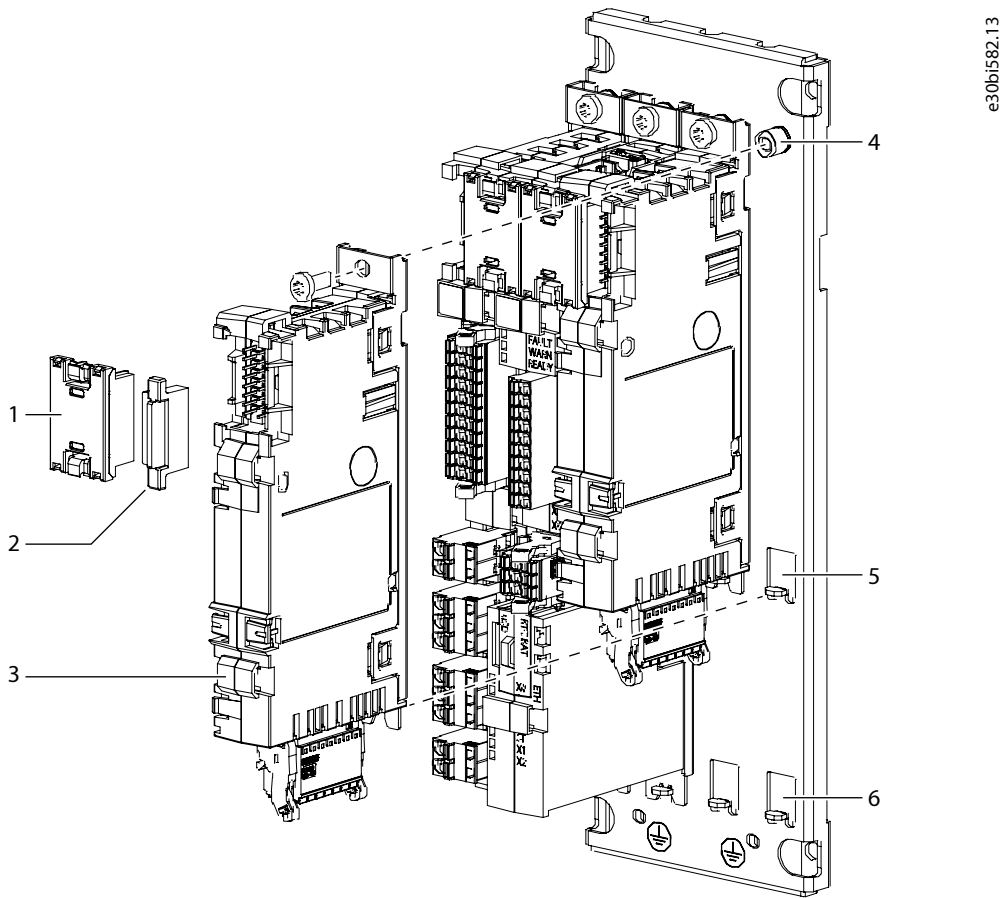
Installing a Board to the Modular Control Unit Mounting Plate
